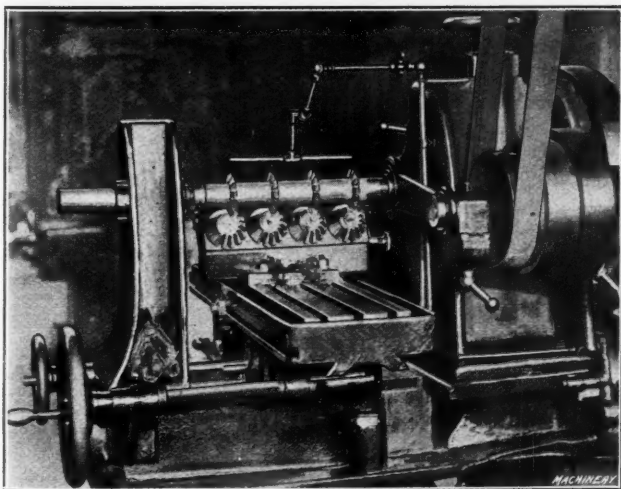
Multiple Fixture for roughing Teeth of Bevel Pinions, applied to Horizontal Milling Machine
